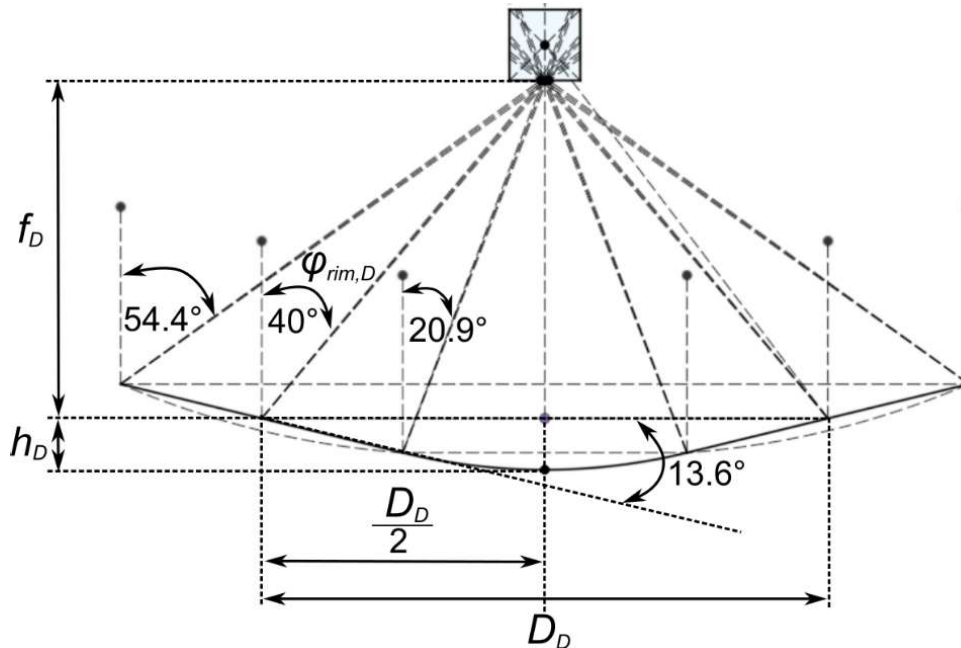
Geometric dimensioning of the multi-facet dish assembly.
